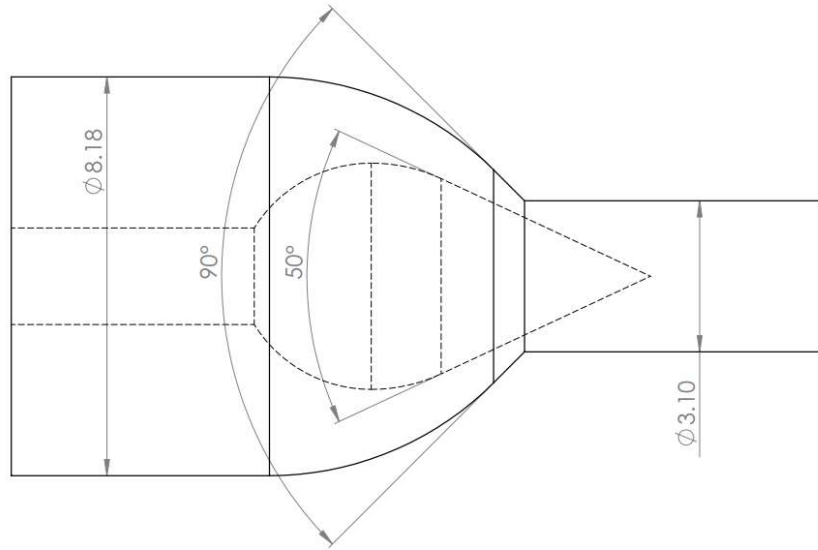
Side view of the Pelton turbine nozzle geometry (All dimensions in cm).
